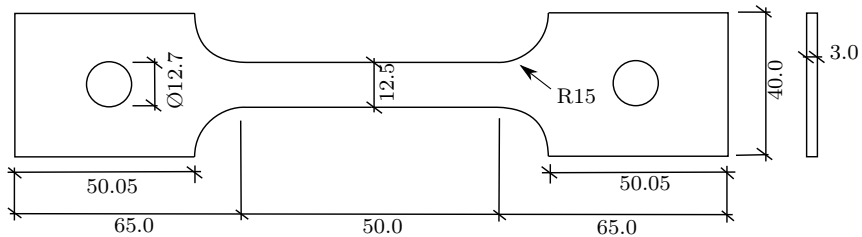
Geometry of the flat specimen with 50 mm gauge length.
